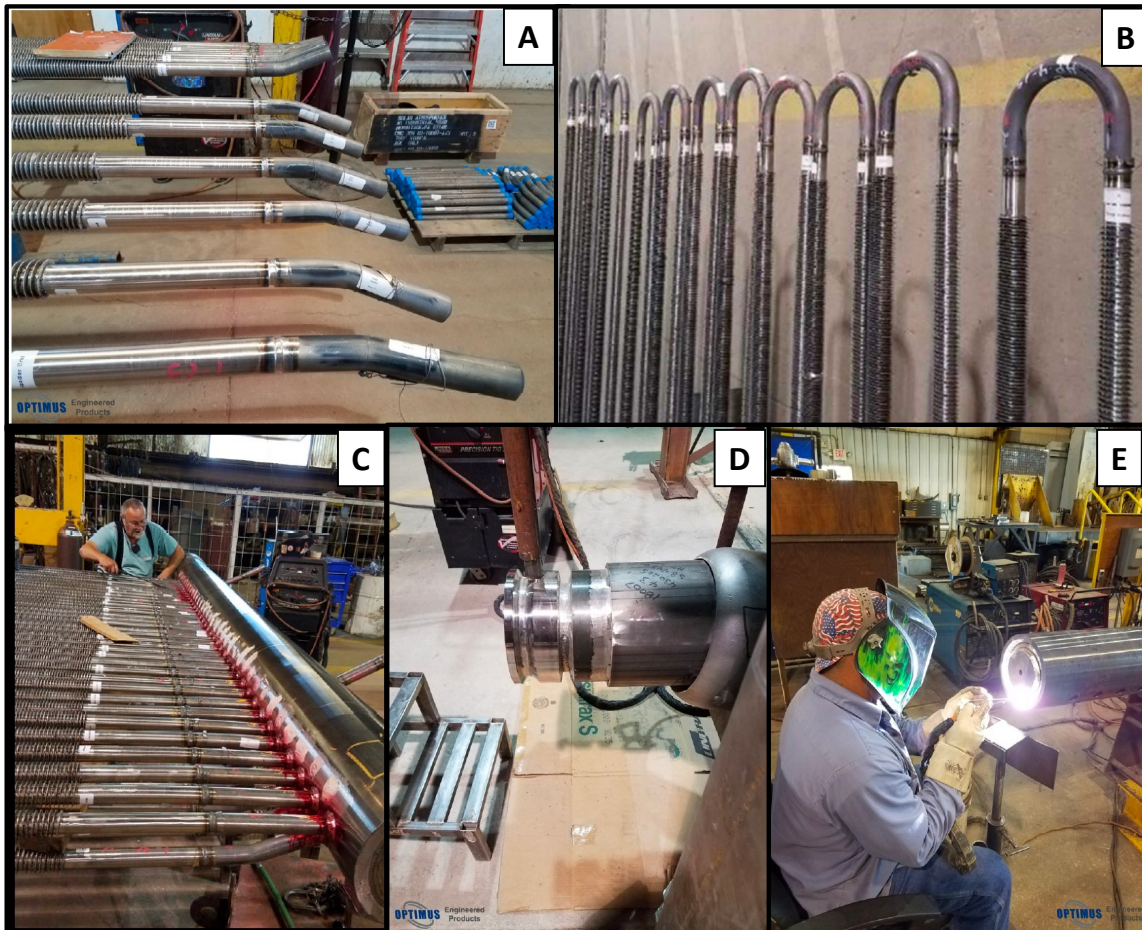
Types of 740H welds in STEP heater: tube-to-tube bend (a), fin butt welds tubes (b), tube-to-header welds (c), pipe-to-flange girth weld (d), and header end cap (e).
